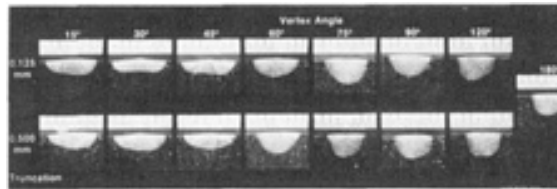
FUSION ZONE PROFILE FOR BEAD-ON-PLATE WELDS AS A FUNCTION OF ELECTRODE TIP GEOMETRY USING 100% AR AS A SHIELDING GAS. WELD PARAMETERS: CURRENT, 150 A; WELDING SPEED, 3 MM/S (0.12 IN./S)
